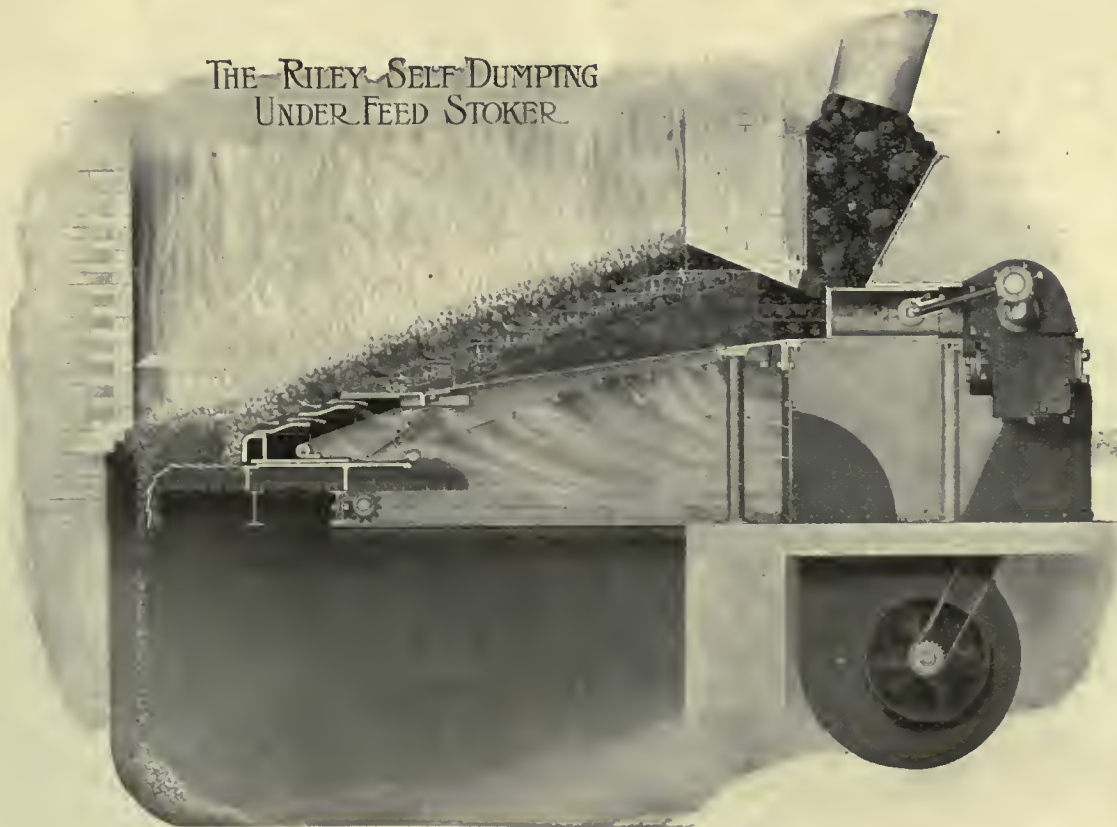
SECTIONAL VIEW THROUGH STOKER.
